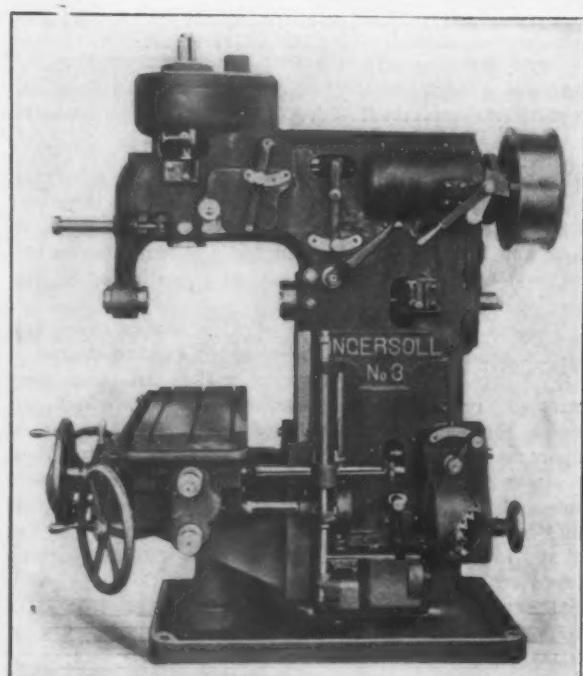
The No. 3 Ingersoll Combined Knee Type Miller.
